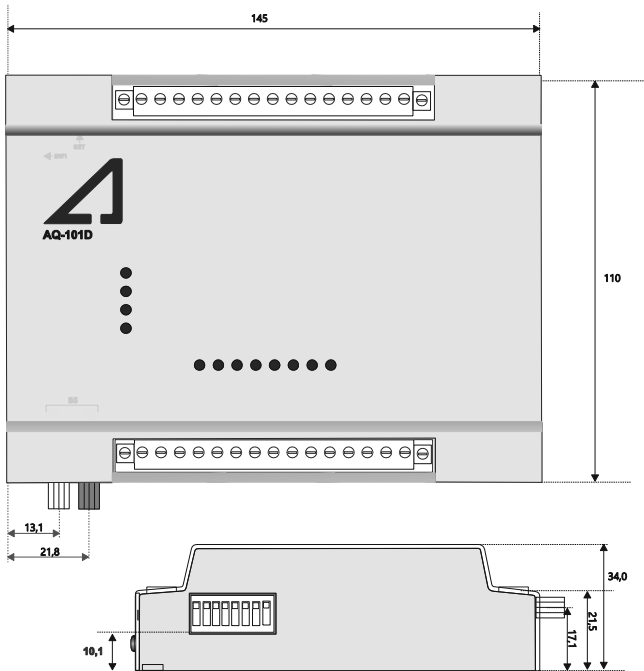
AQ101D device dimensions, all dimensions in millimeters.
